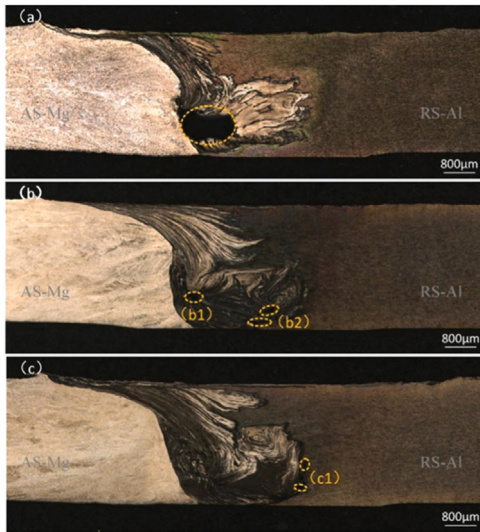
Weld cross-sectional macrographs of FSWed AA6061/AZ31B joints: (a) FSW without pulse current assistance, (b) pulse current: 300 A, and (c) pulse current: 500 A (note reduction in the amount of defects with increasing current) [91].
